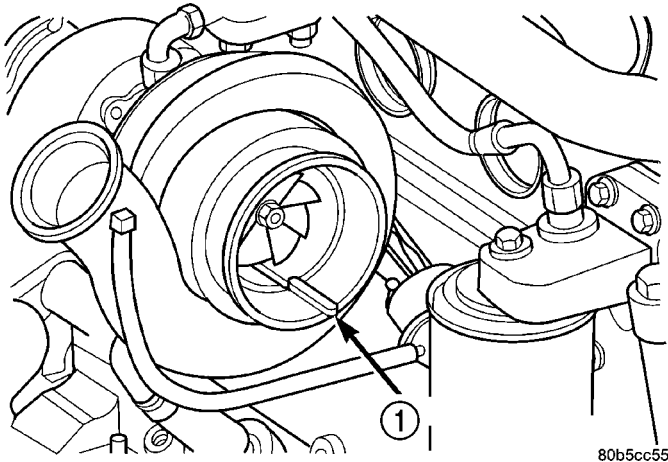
Measure Turbocharger Bearing Radial Clearance - Typical
